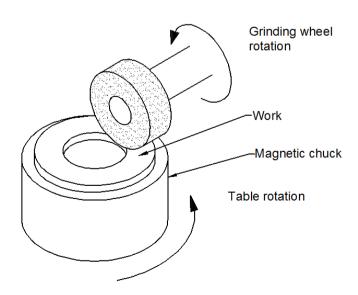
Horizontal spindle Rotary table Surface Grinder
